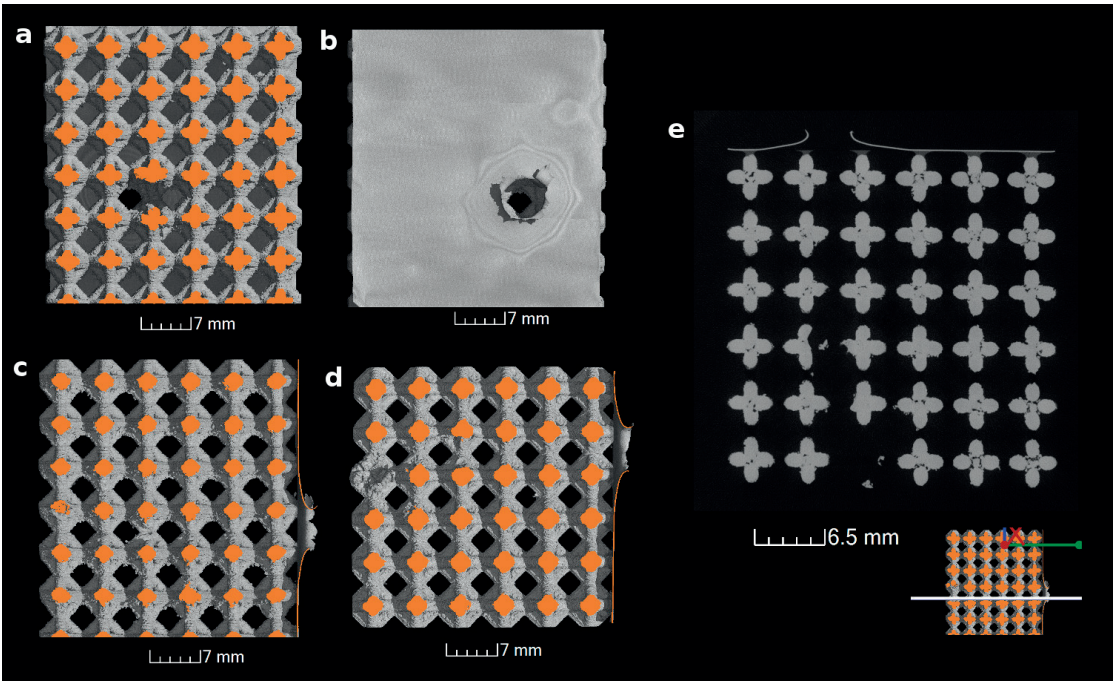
Cross-section of tested sample 8. a) Front view without MLI, b) rear view with aluminum skin, c) right view at impact hole level, d) top view at impact hole level, e) HD CT-scan image of the right view at the impact hole level (cross-section in d)). Reproduced from [216].
